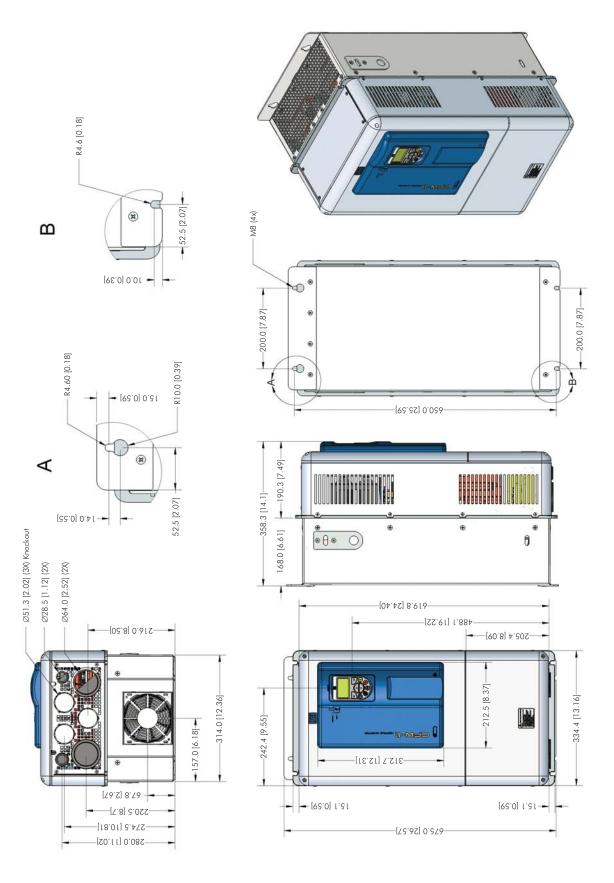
Inverter dimensions - frame E - mm [in]
